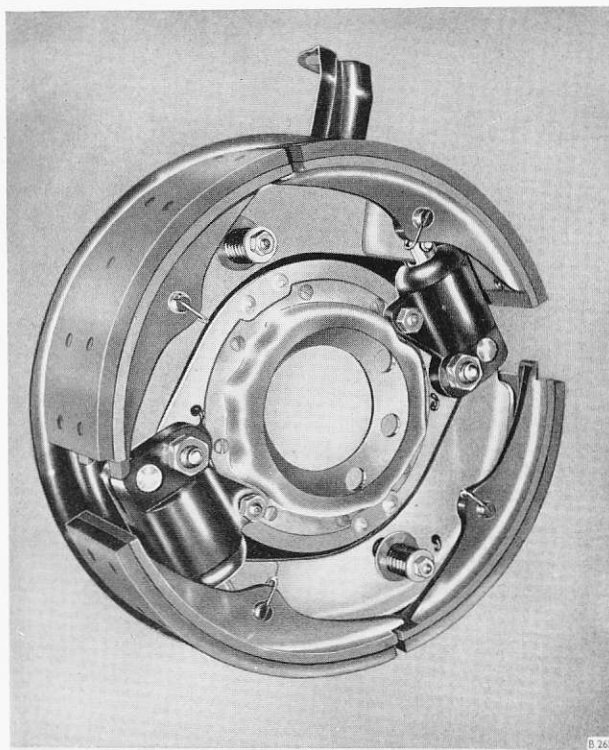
Bentley Continental S2 — four shoe brake — assembly
